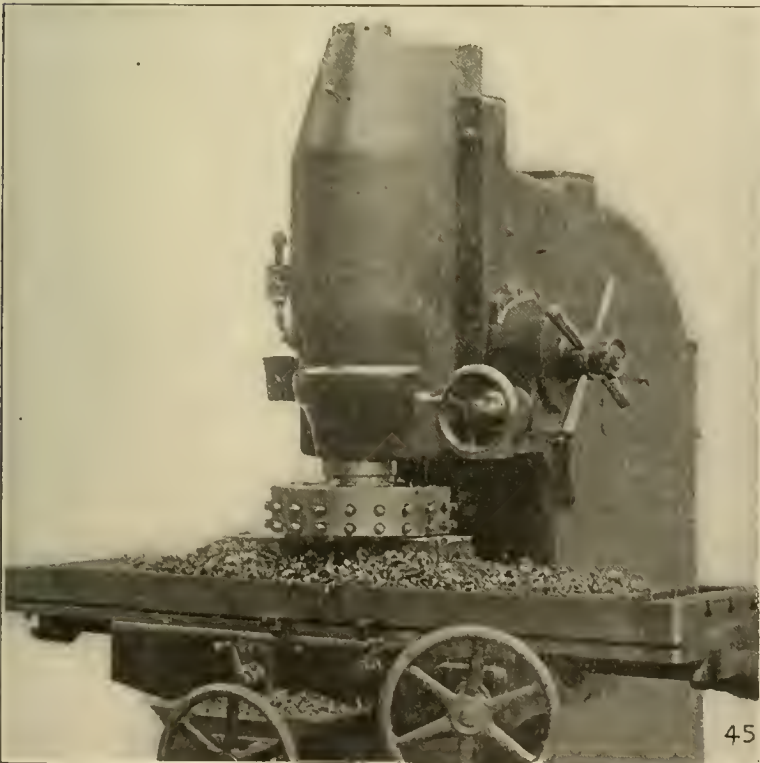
HIGH POWER VERTICAL MILLING MACHINE, REMOVING 10 CUBIC INCHES OF MATERIAL PER MINUTE FROM FORCED STEEL BARS, CUT $\frac{1}{8}$ IN. DEEP AND 5 IN. WIDE. FEED 16 IN. PER MINUTE.
